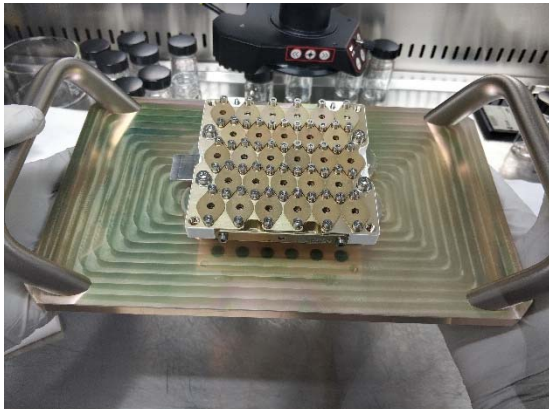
ALL SAMPLES ASSEMBLED. BACK END OF THE SCCT IS FINISHED
